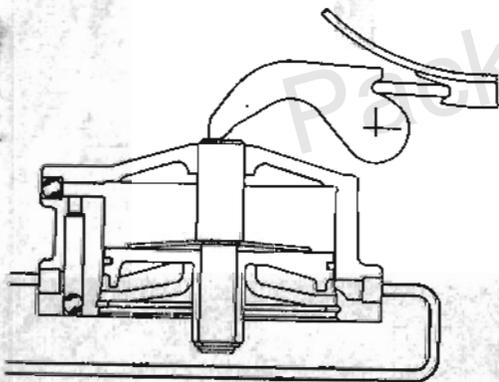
CROSS SECTION THROUGH REVERSE BRAKE
